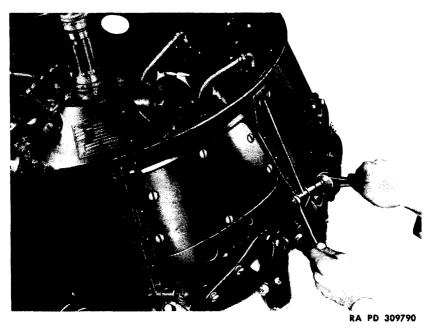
Removing Nut and Bolt From Cowl Attaching Boss
